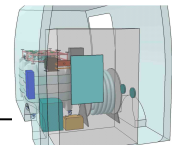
Technical Drawing BEER-kryo® Source BEF GmbH
